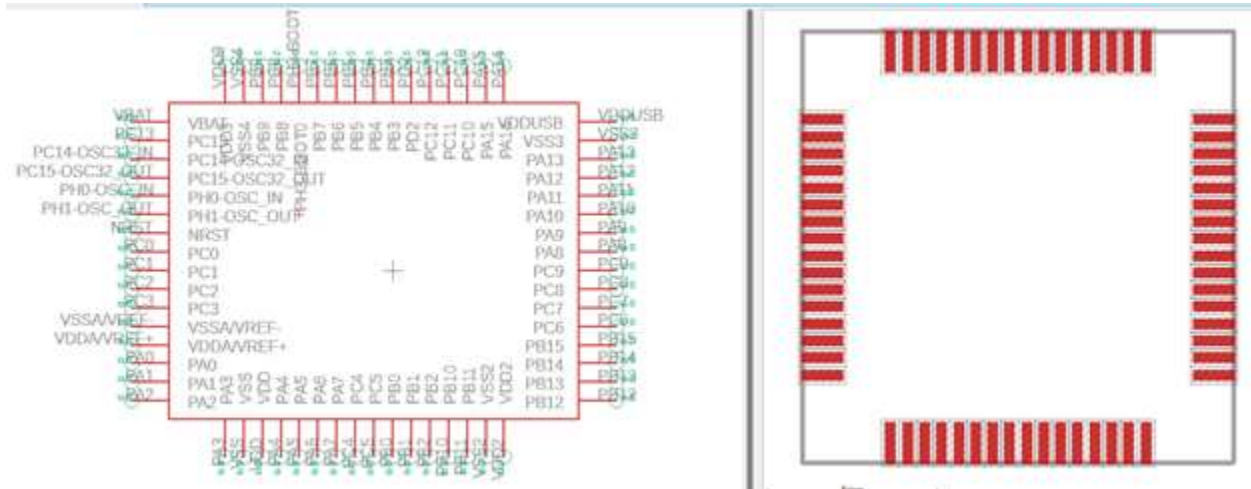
Footprint and symbol for STM32L552 for the testing PCB
